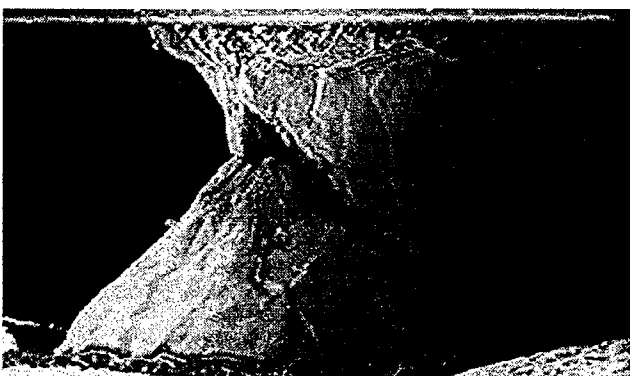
Example of bump solder creep showing the two interfaces within the device separating from one another.
